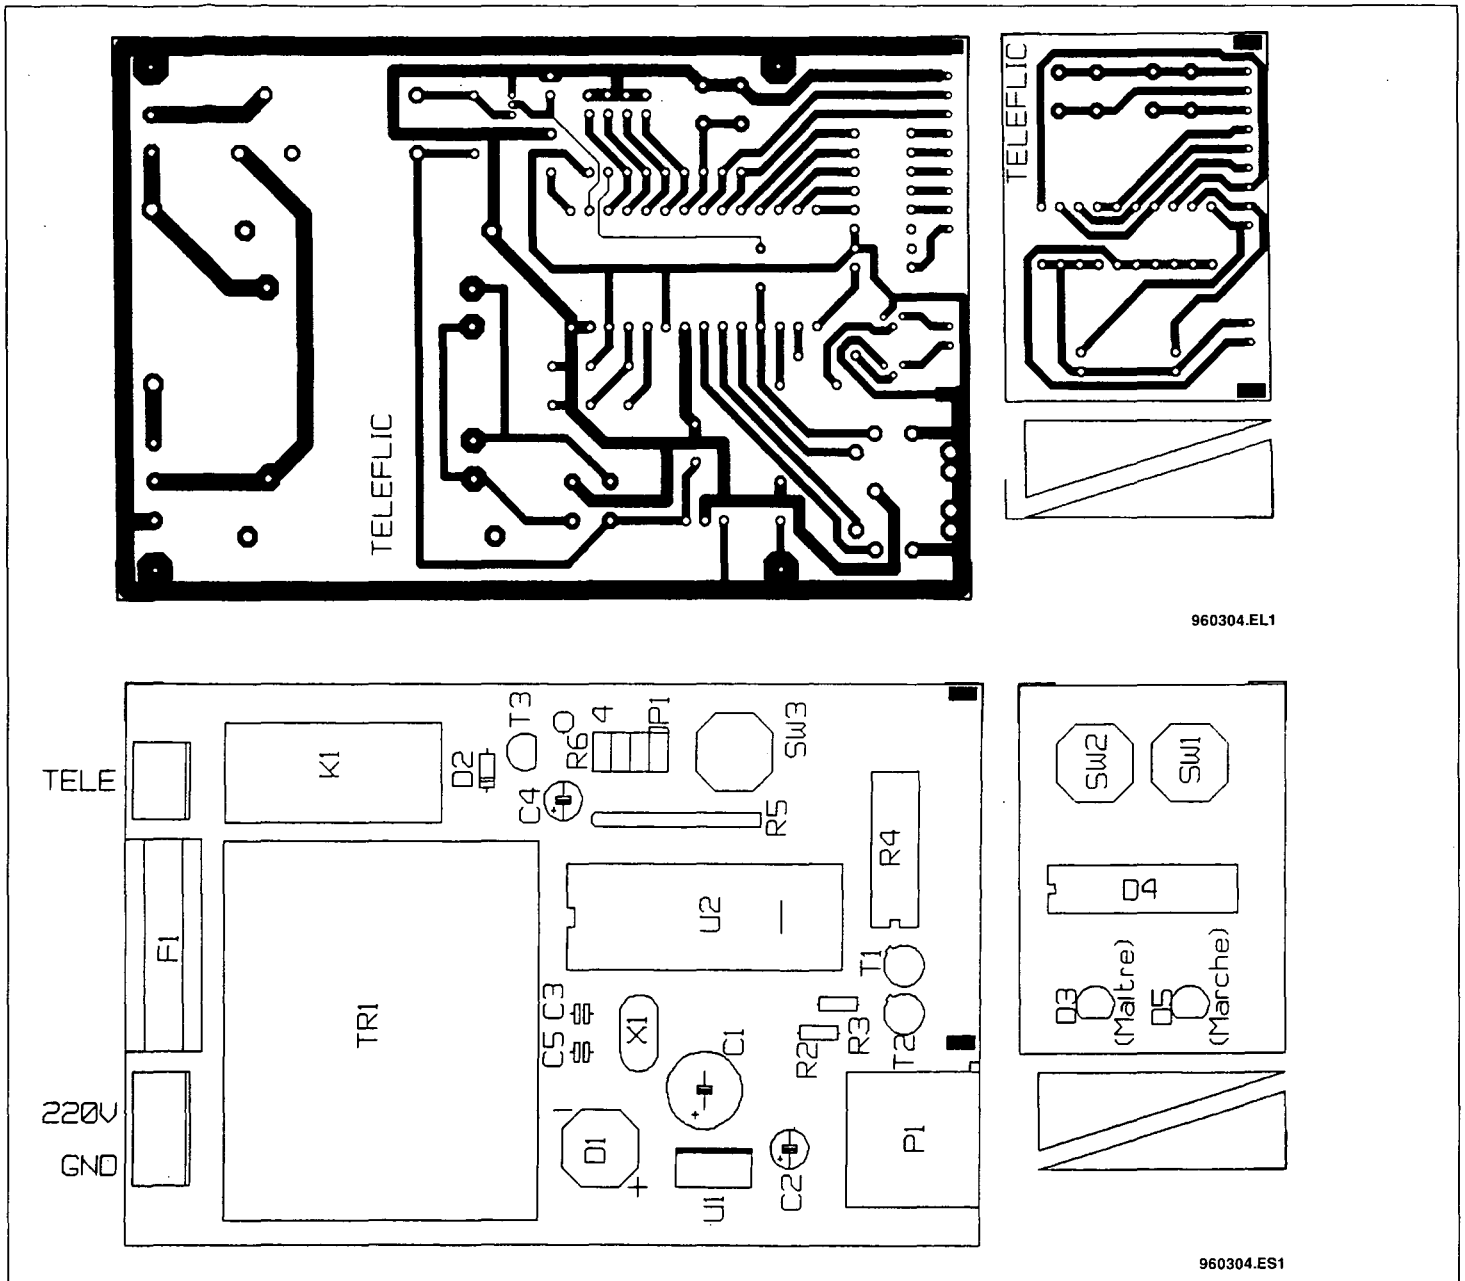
Copper track layout and component mounting plan. Artwork produced with Layo1E.
